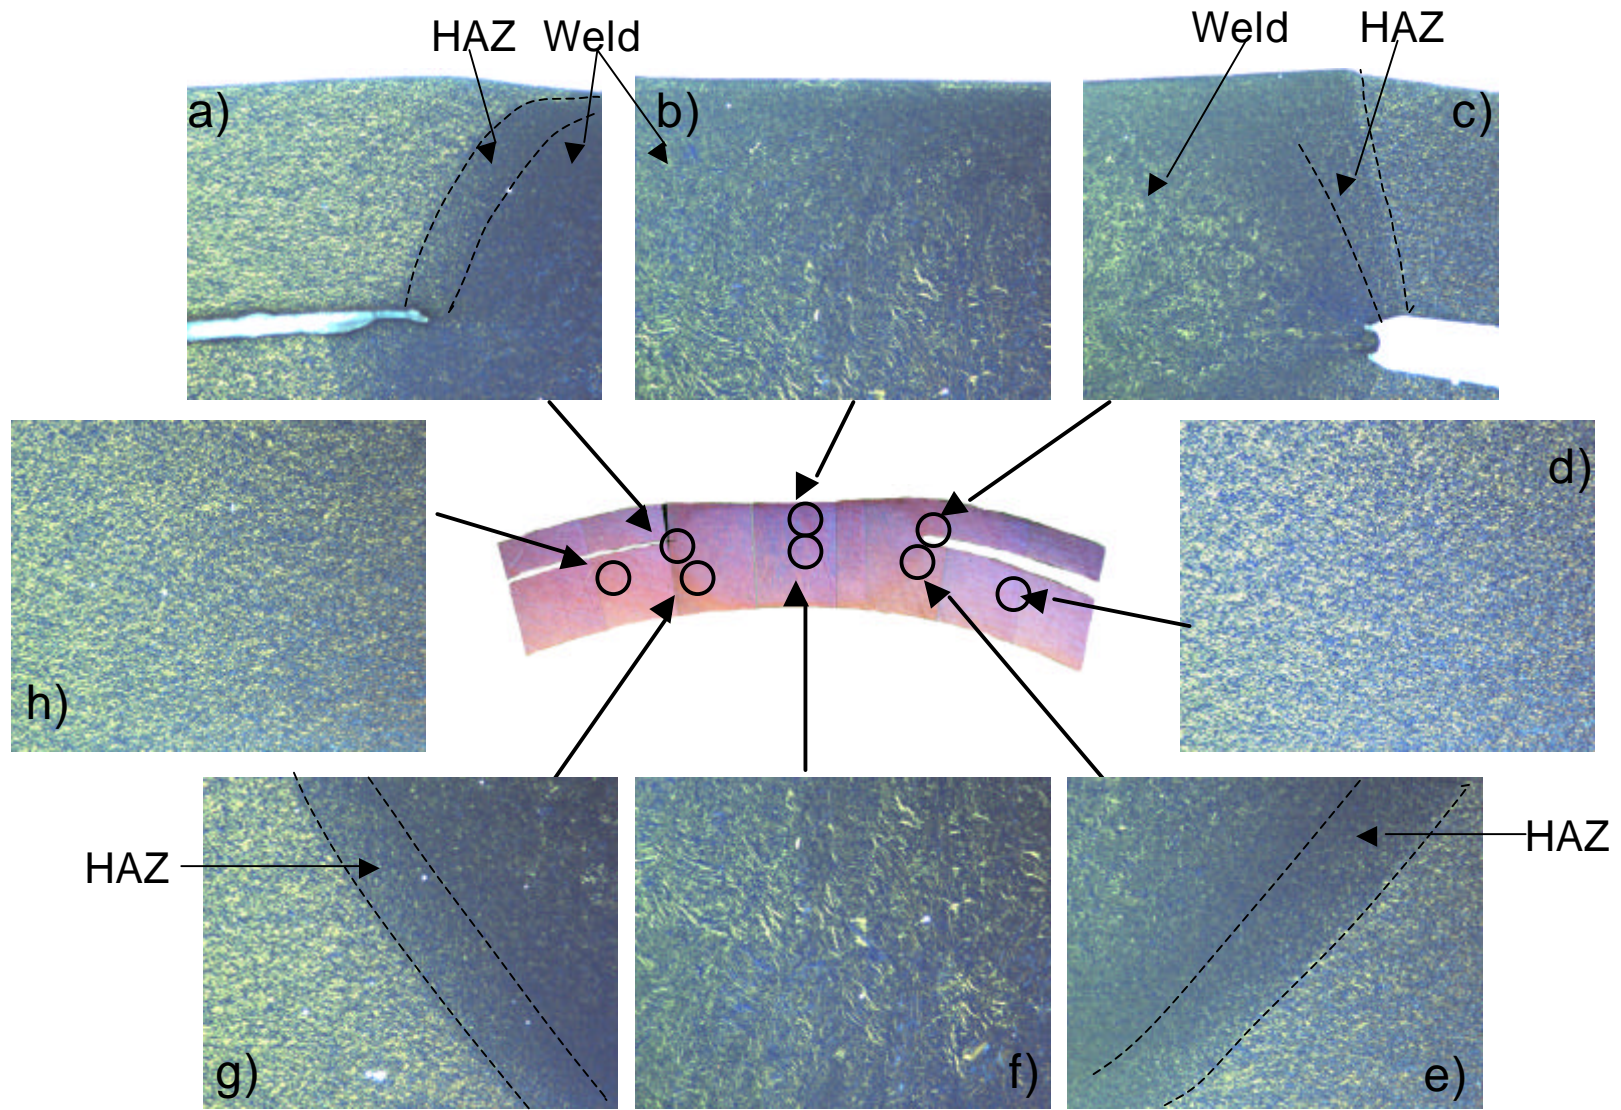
Microstructures of spot welding parts of SRA ZIRLO guide thimble and thin sleeve spot weld
